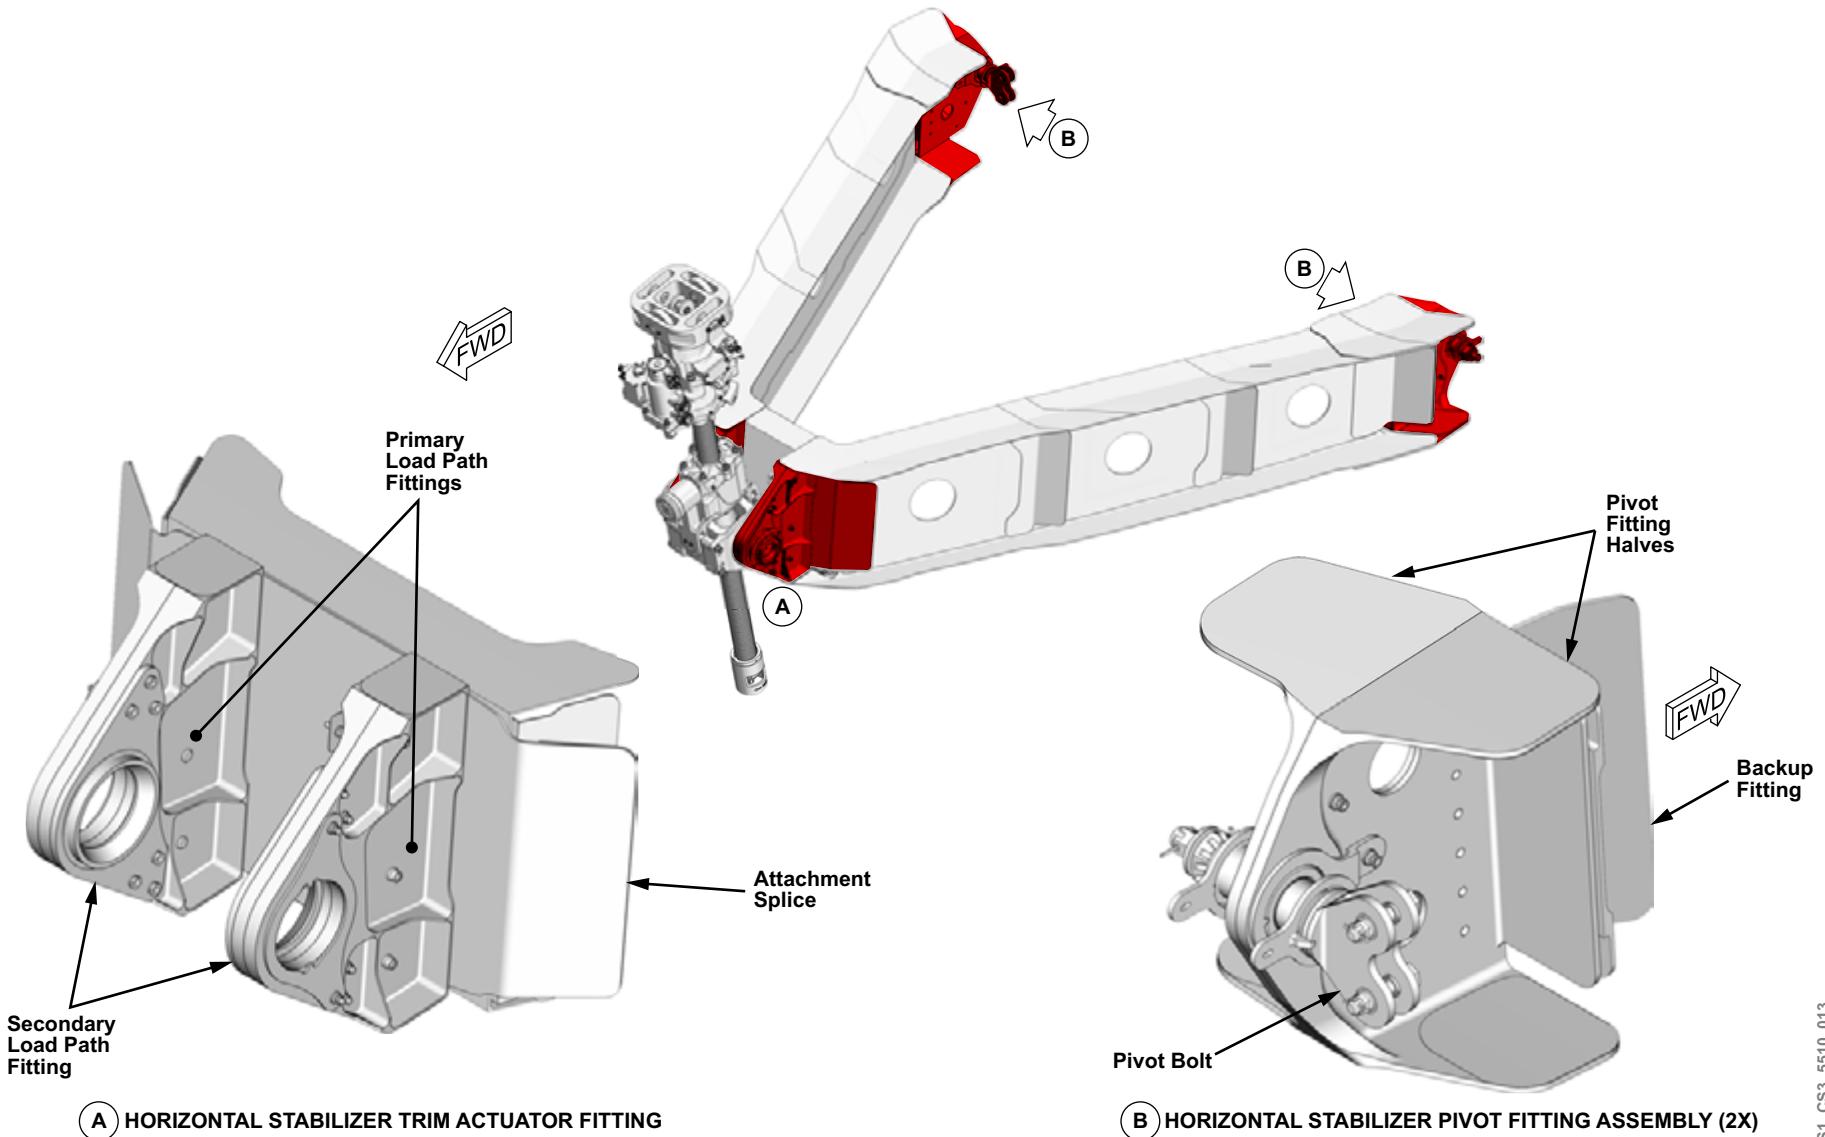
Horizontal Stabilizer Trim Actuator Fittings and Pivot Fittings
